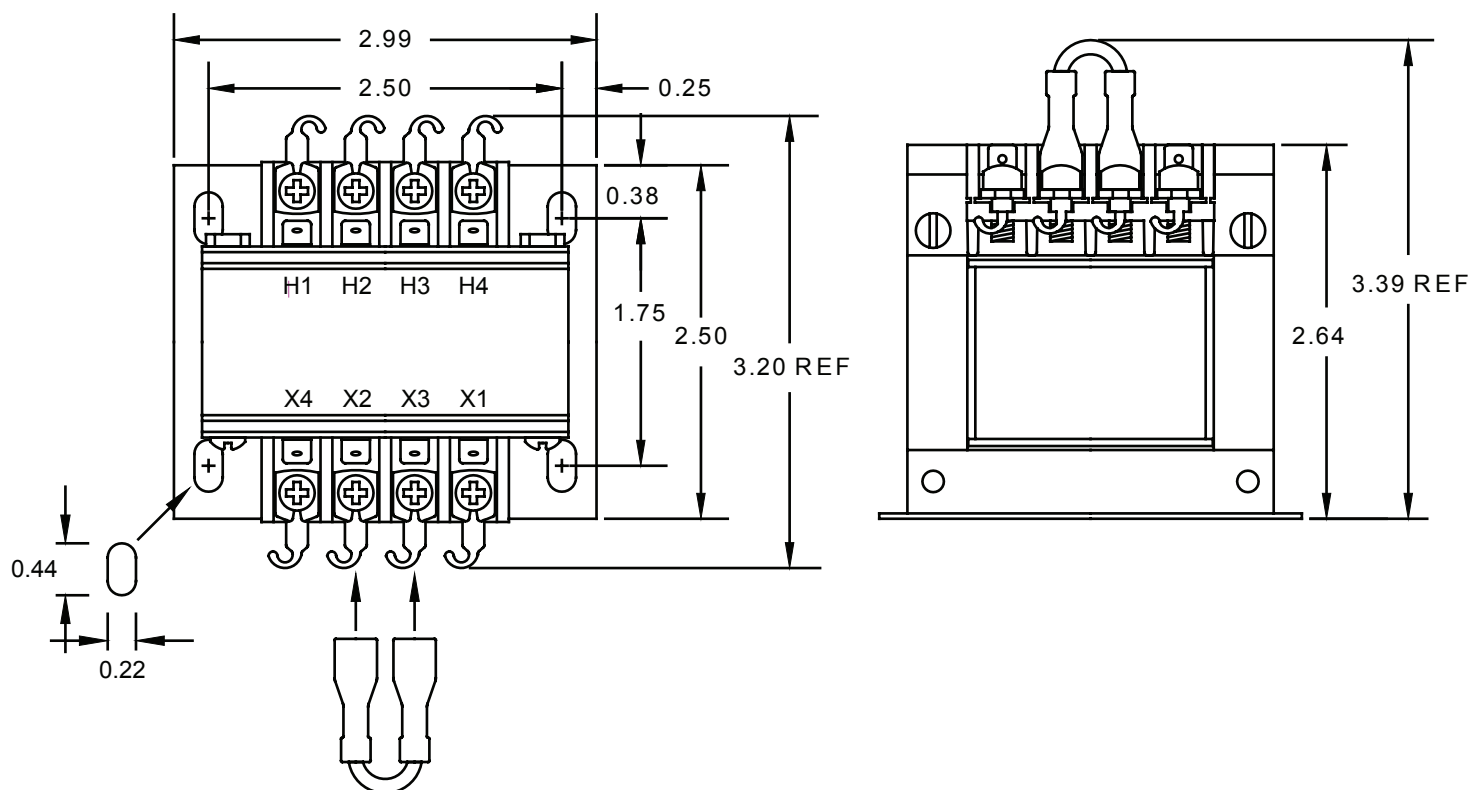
Mounting dimensions of 70 Amp model 1032A.
